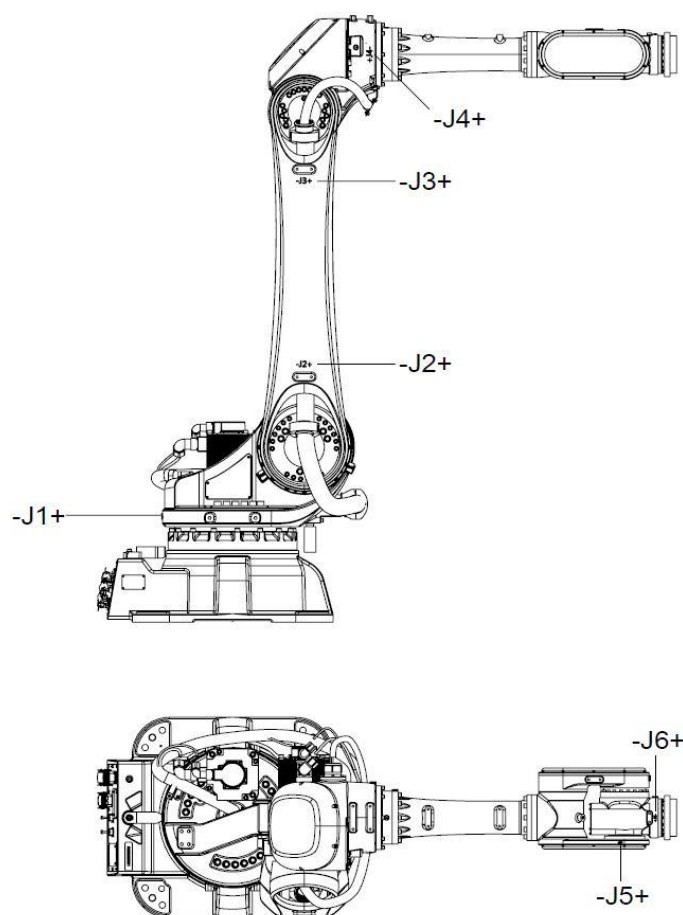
Axis Direction Indicators on the RX3-A680-2560 Manipulator
